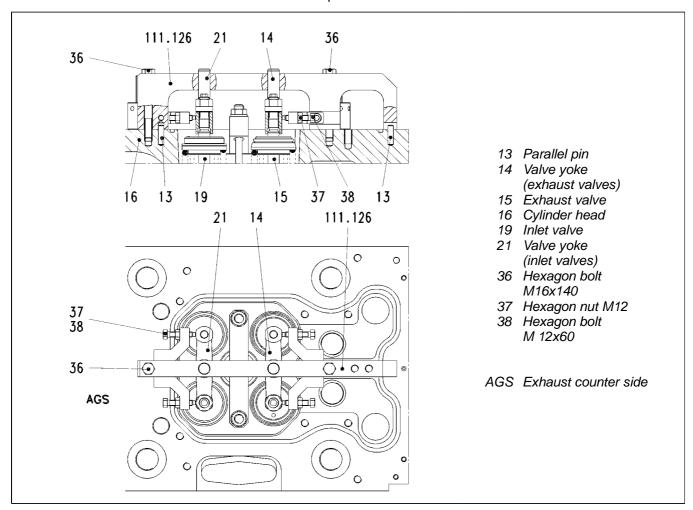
Fixing the valve yokes to loosen/tighten the nuts on the setting screws
